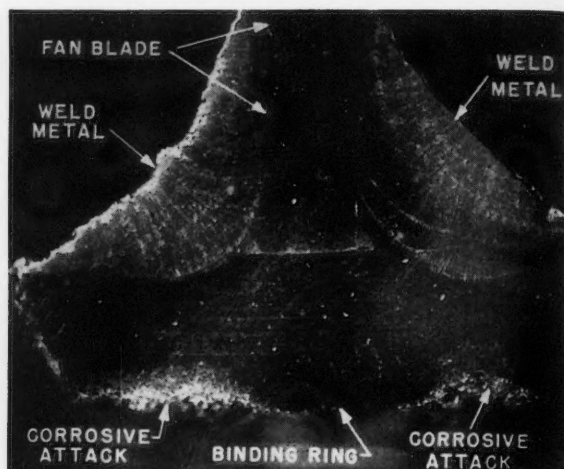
Photomicrograph showing corrosion of fan impeller. Original magnification, 8X; actual magnification after reduction for engraving purposes, 6X.
